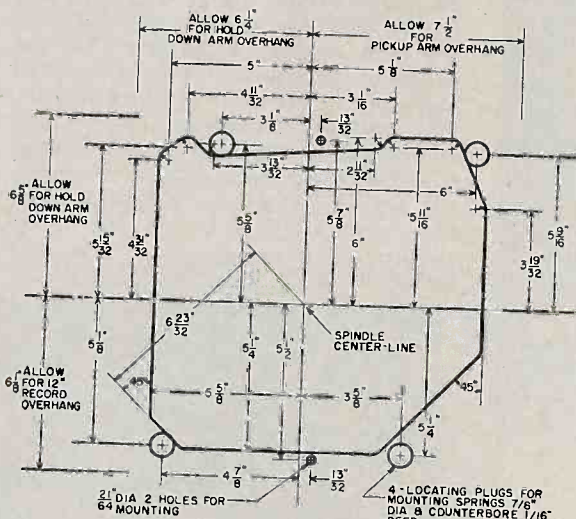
P13 AND P15 PANEL CUT-OUT DIMENSIONS
